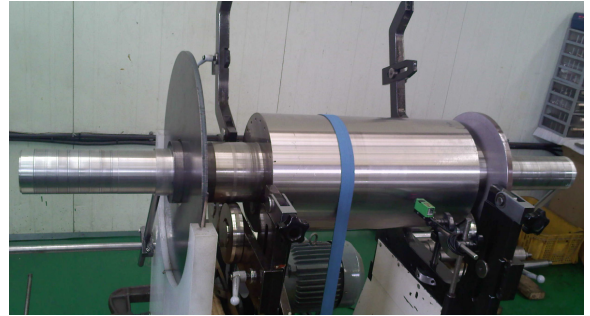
Balancing of flywheel with a superconductor bearing rotor.
